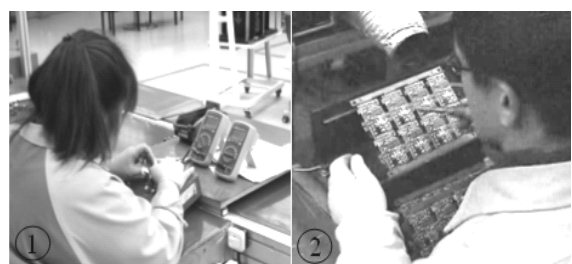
Defined Tasks: 1. Circuit test of PCB, 2. Soldering inspection and repairing of PCB
